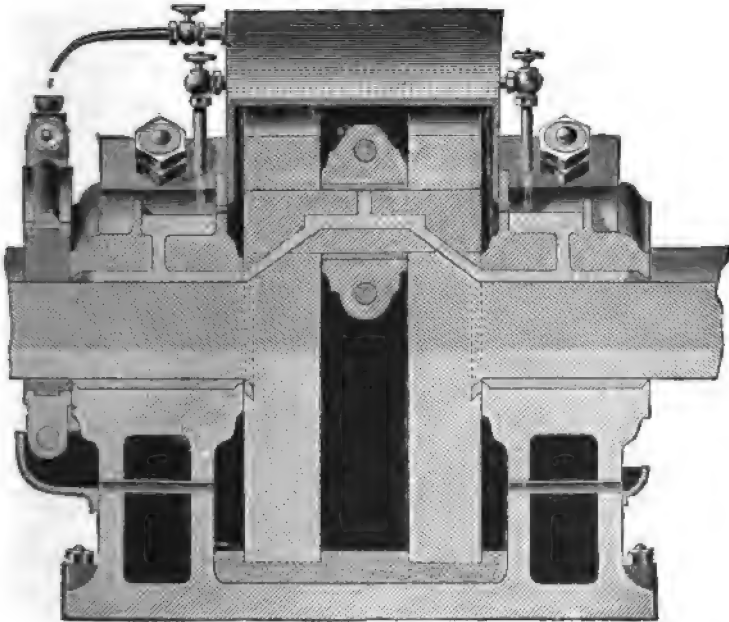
CRANK-SHAFT AND BEARINGS.
